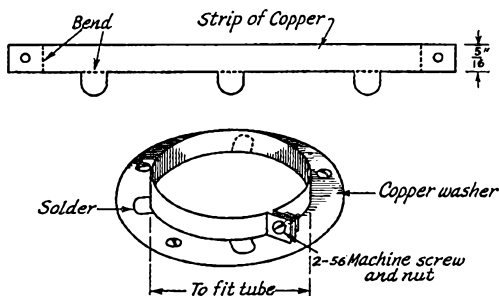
A simple method of constructing lighthouse-tube sockets. Dimensions should be adjusted to fit the contacts of the type of tube used, and should not put any strain on the plate and grid seals.
